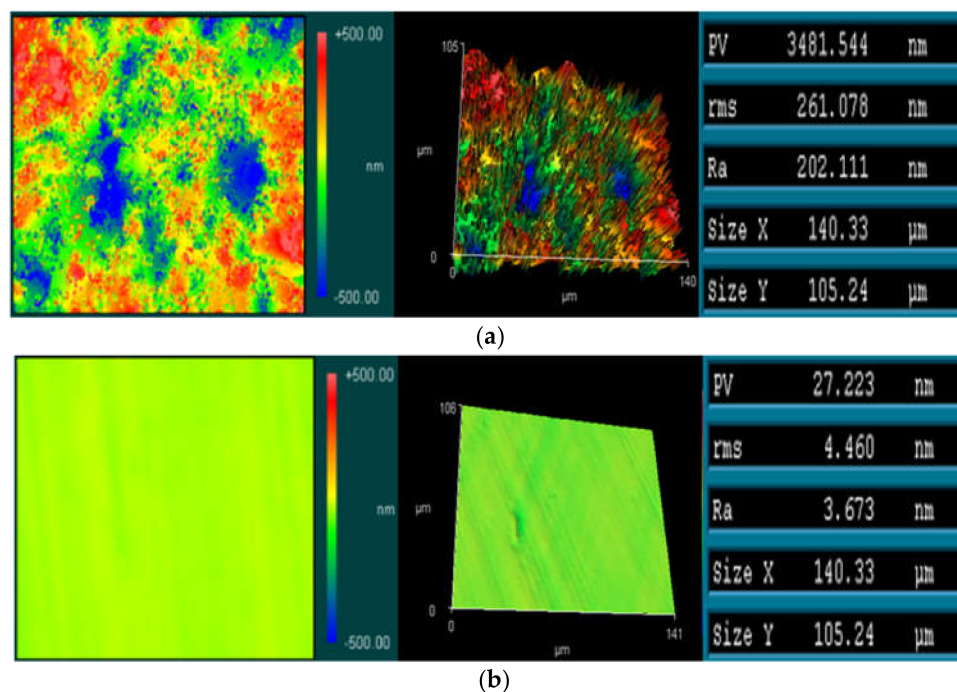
Surface of the workpiece before and after finishing (Load: 10 N, magnetic particles: 330 μm). (a) Before finishing; (b) After finishing.
